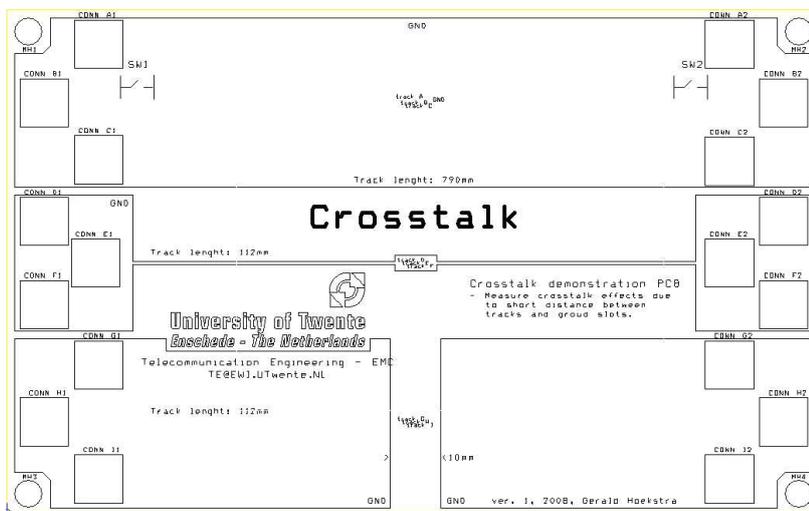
The Crosstalk Layout Issues Board Silk Screen.
